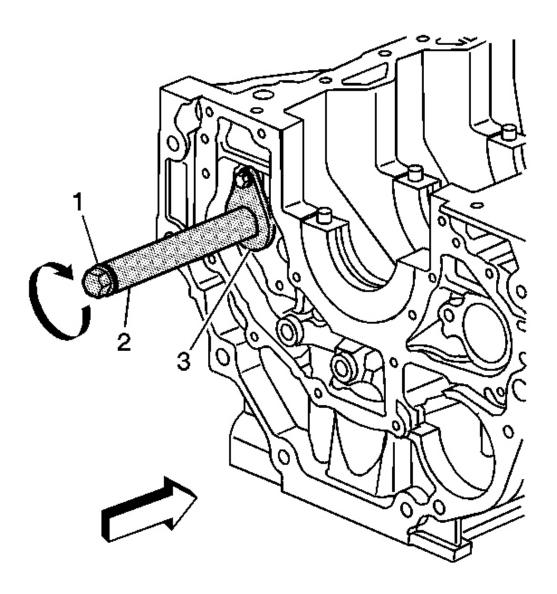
Installing J 44225 - Spacer Between Guide & Washer - Right Courtesy of GENERAL MOTORS CORP.
